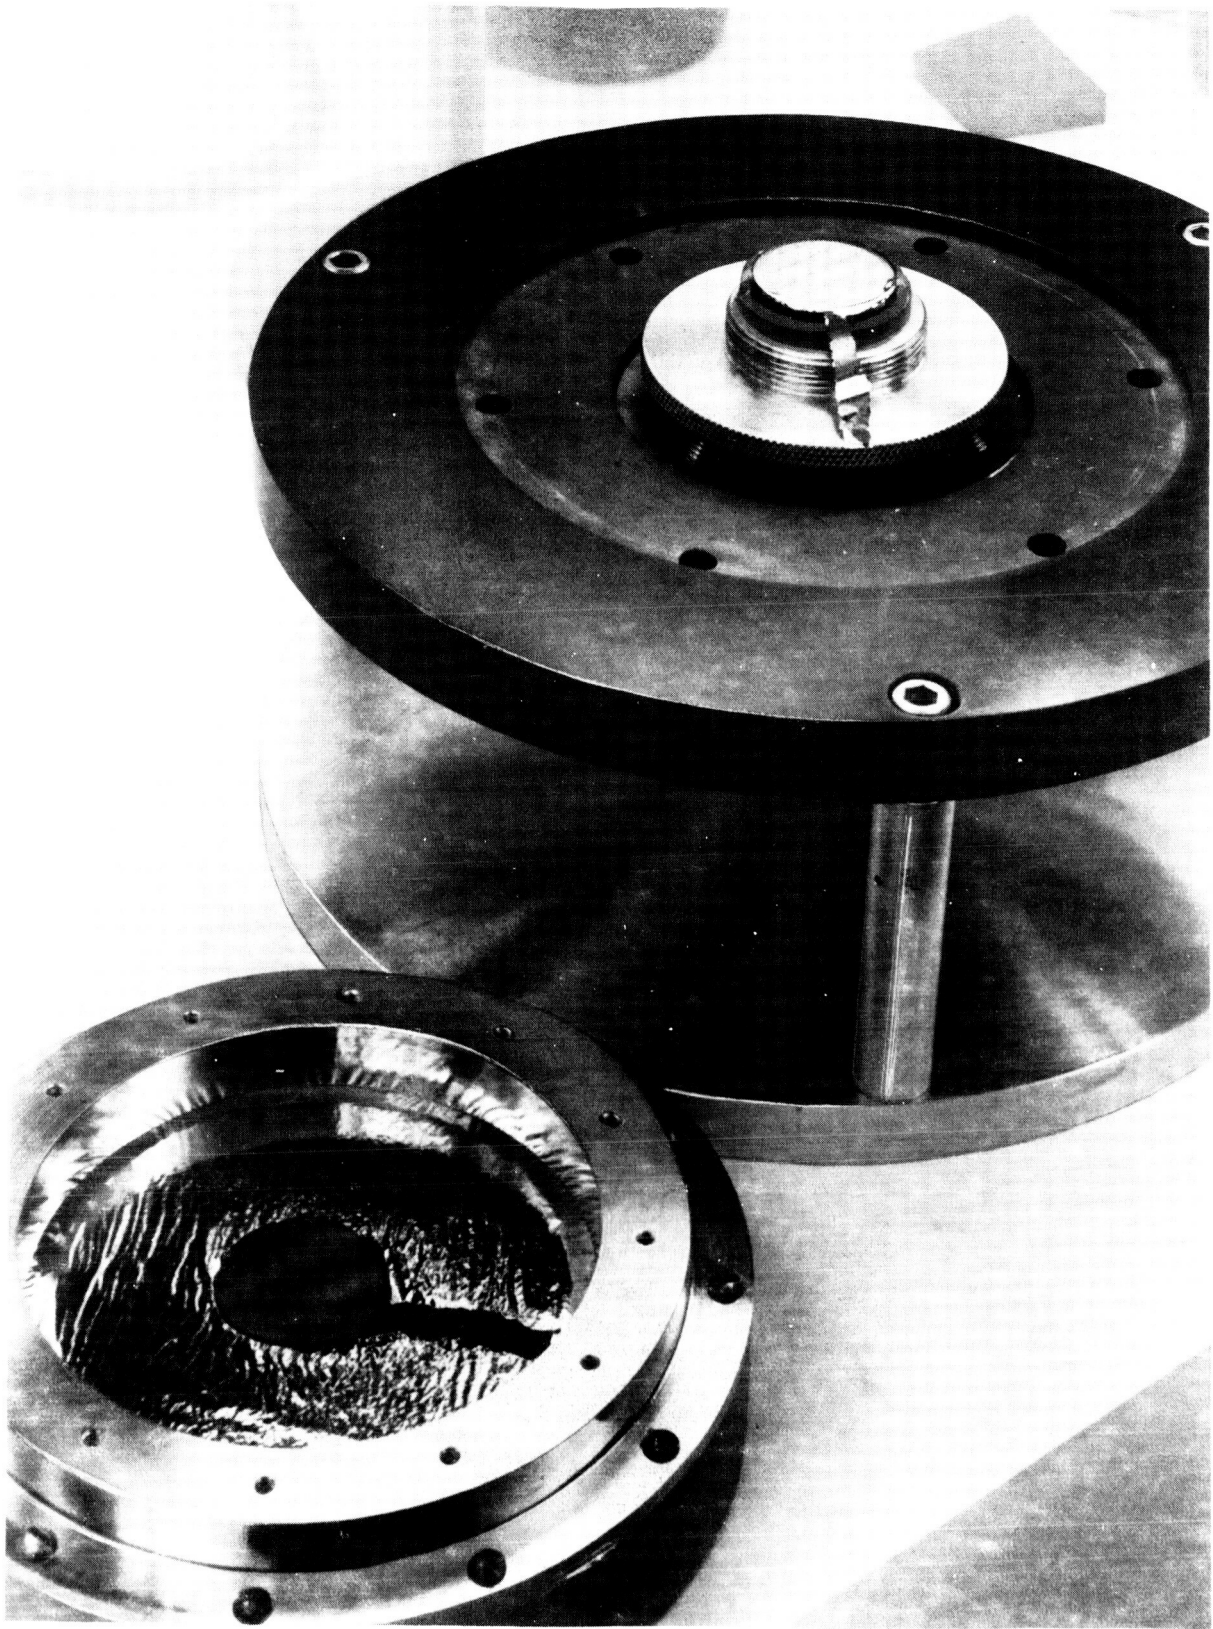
MIROS Subassembly Removed from Assembly Fixture
